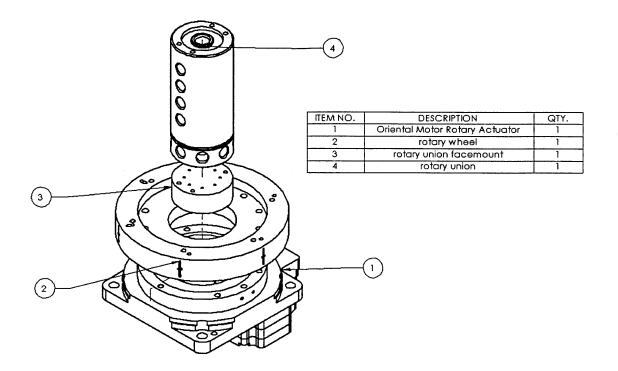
Assembly drawing of the parts of the rotary wheel
